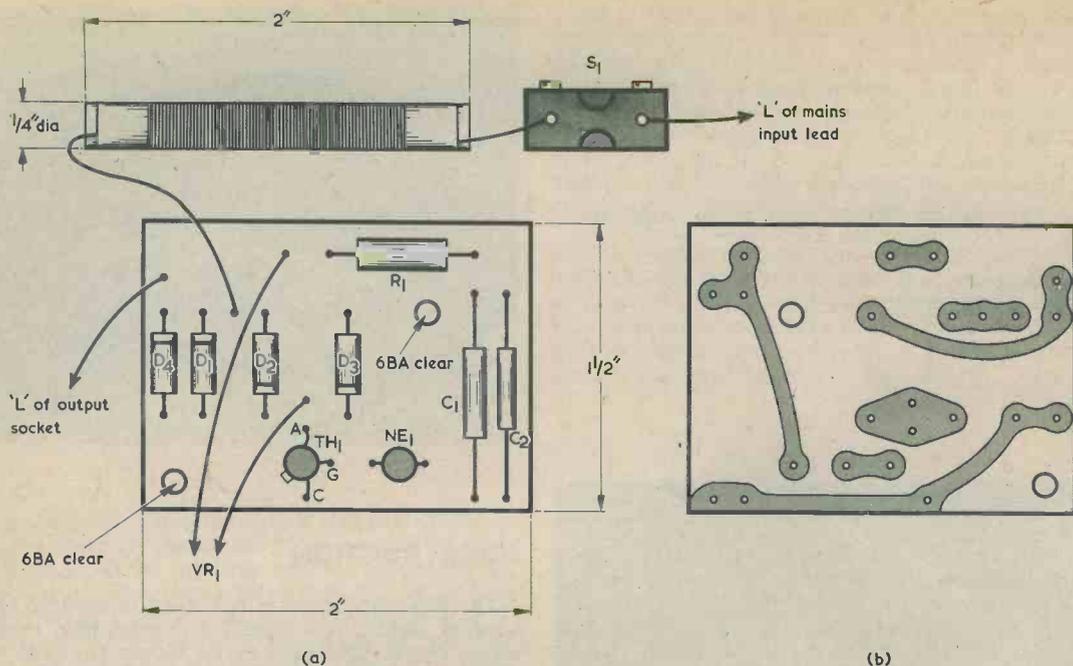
(a). Wiring on the component side of the printed board. The two 6BA clear holes are for mounting purposes
